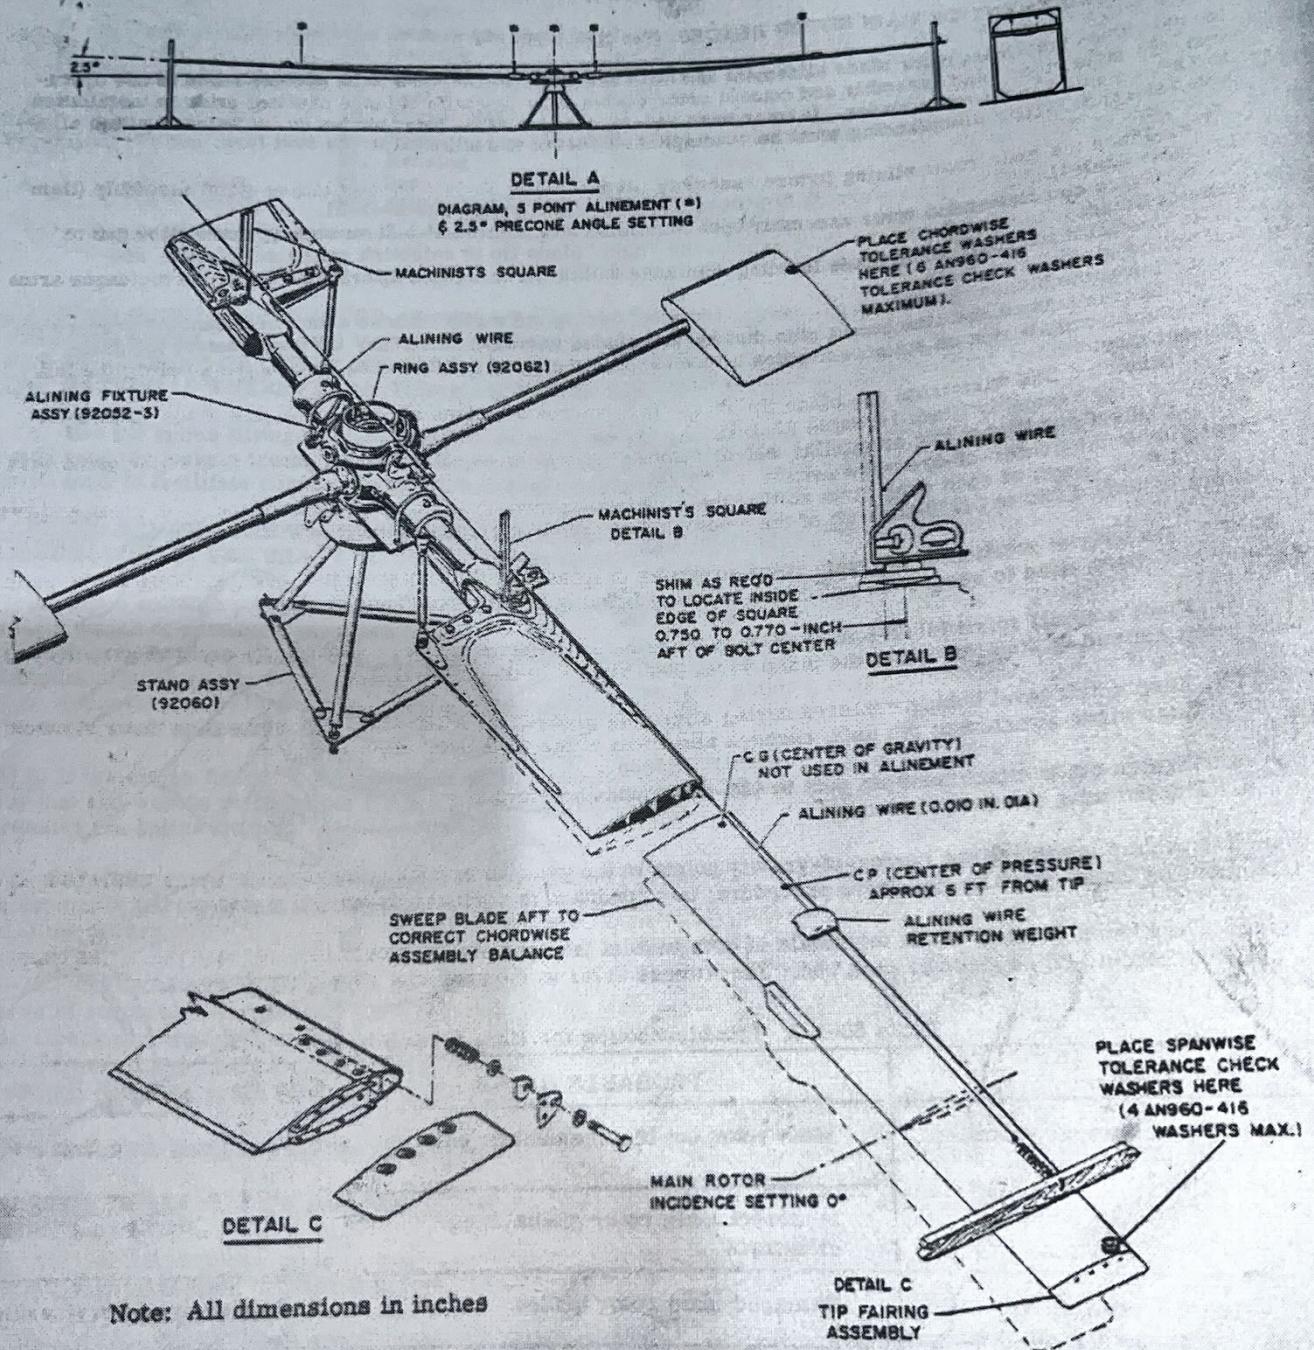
Main Rotor Blade Alinement and Chordwise Balance
